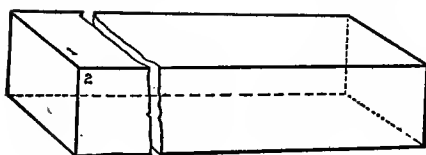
Perspective Drawing of the Parts of the Lap Joint
